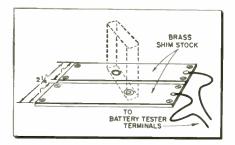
Two strips of brass shim stock attached to board provides a test adaptor for rapidly checking clip-type batteries.
